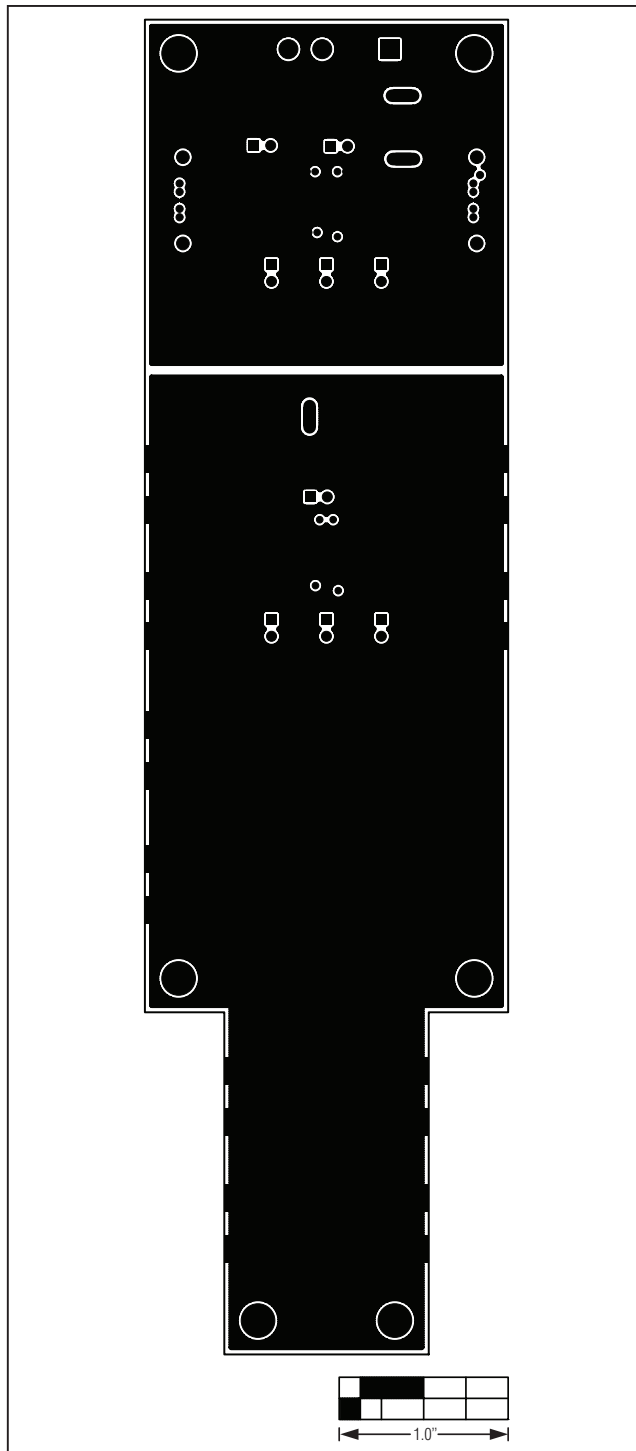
MAX4951AE EV Kit PCB Layout—Solder Side
